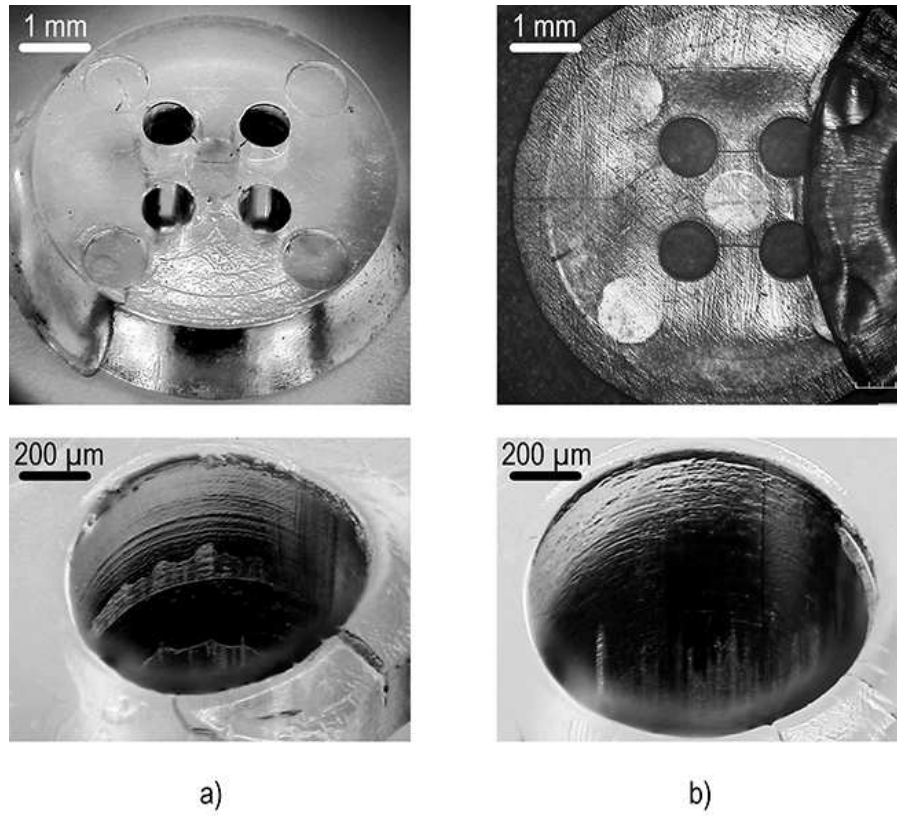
Produced molded parts with: a) mold Insert 1 and b) mold Insert 2) [82].
